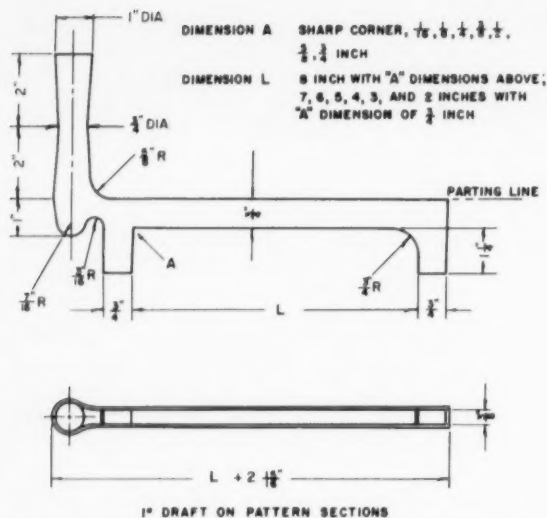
The design of patterns for the hot cracking test castings.
